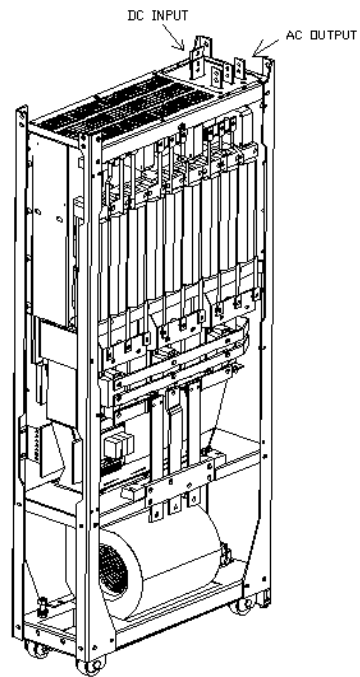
AFE 3D drawings – Upside AC OUTPUT
